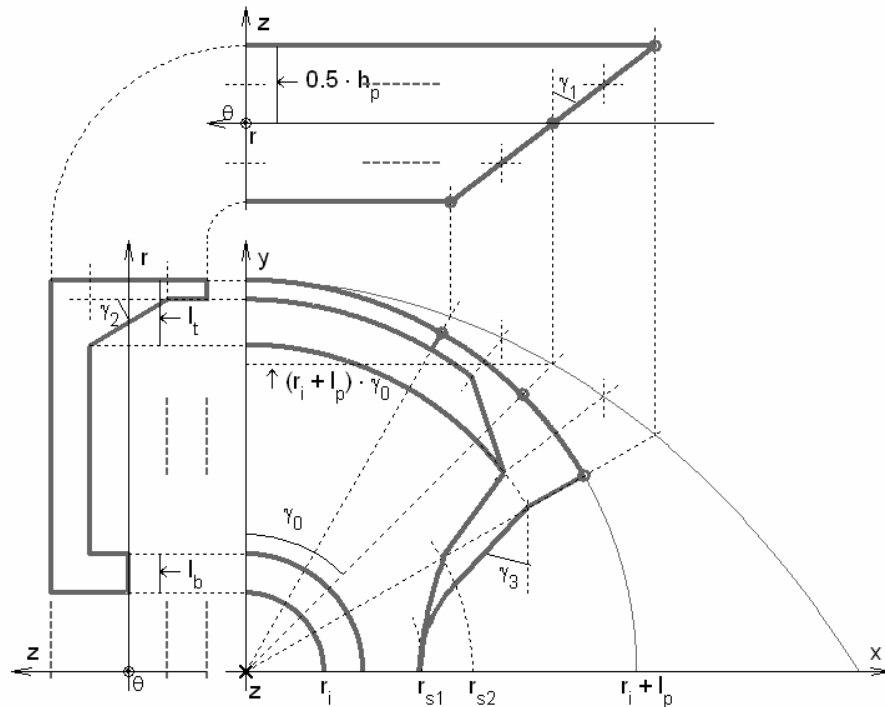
Formulation of a claw-pole core for an outer rotor motor. The core geometry is shown in the  $\theta z$ ,  $rz$  and  $\theta r$ -plane.
